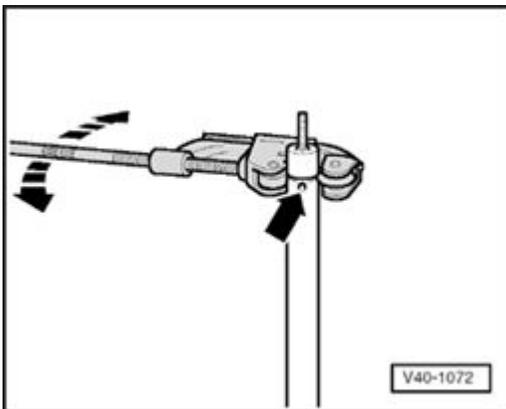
Cutting Through Outer Tube Using Pipe Cutter
